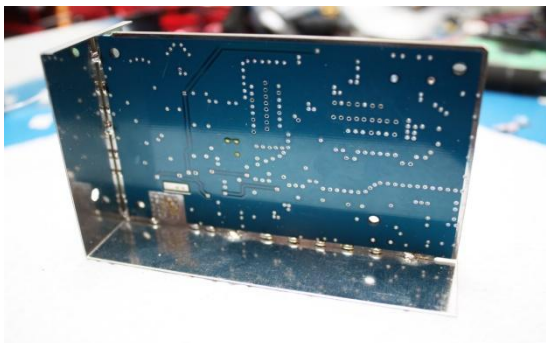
Complete, assembled board, in the recommended tinplate box housing.
